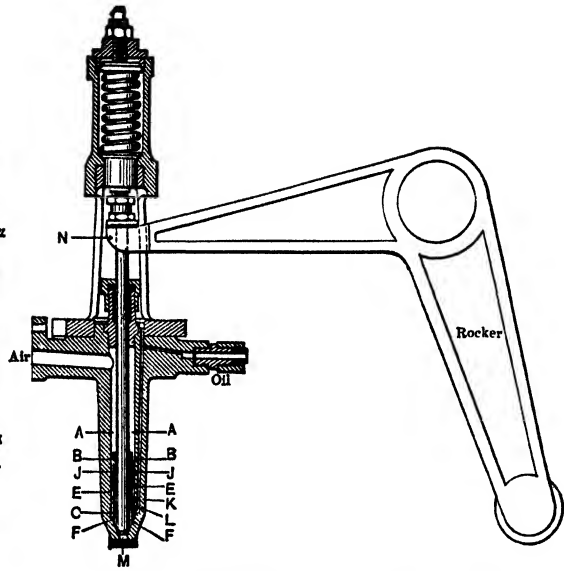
McIntosh & Seymour fuel-valve assembly.
